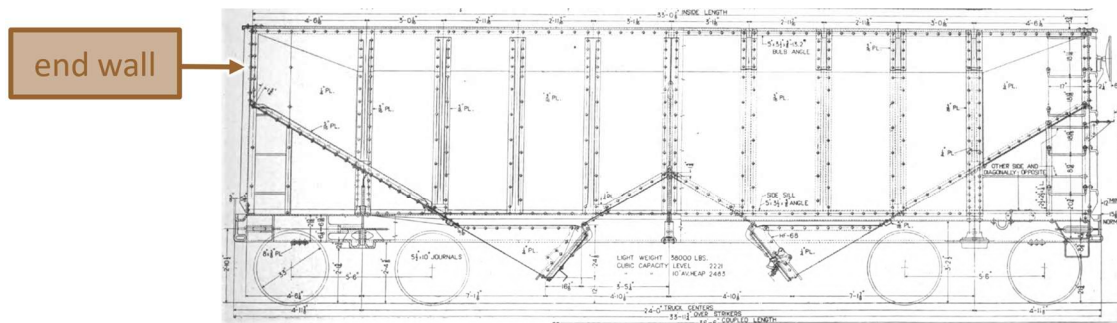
Plan and elevation of Unitcast design, high-capacity, 60-ton twin hopper car with cast steel center sill, body bolsters, crossbearer, crossbearer arms and hopper frames
